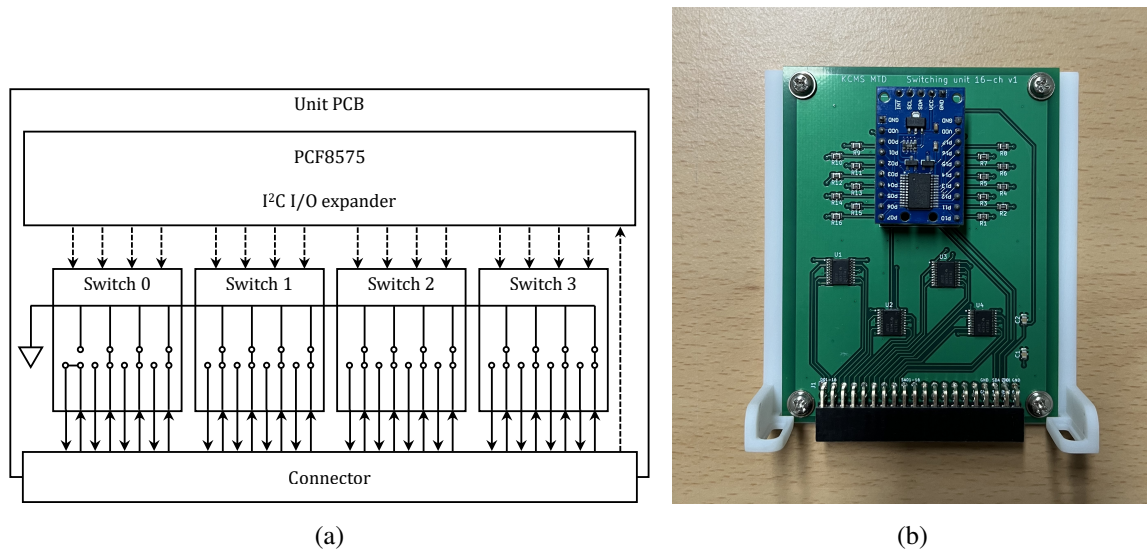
Unit board (a) Schematic diagram. One unit board integrates four 4-channel analog switches together with a PCF8575 I/O expander for digital control via I²C. (b) Fabricated unit board.
